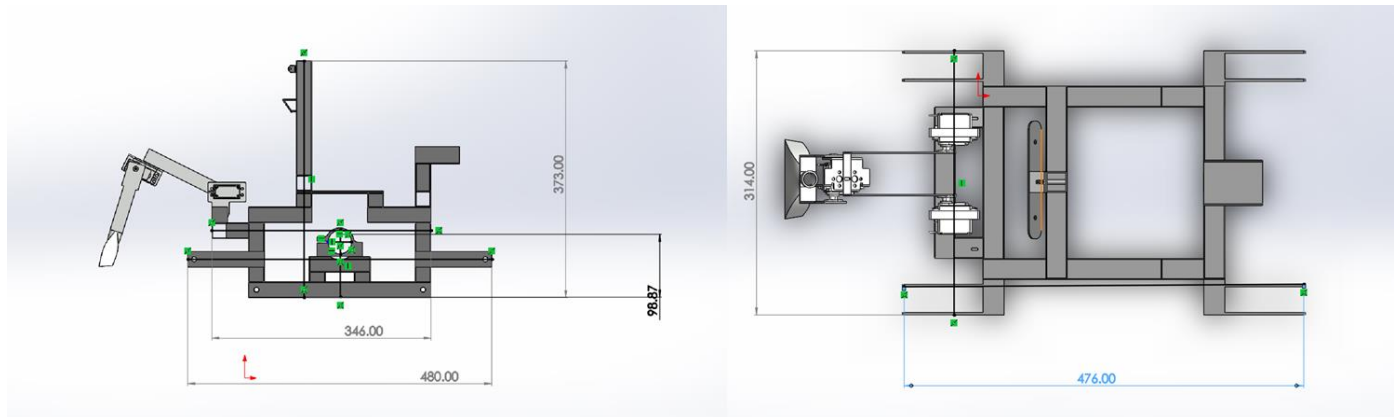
front view and top view measurement of the EPRSDC using 25 x 25 square hollow section tube pipe rages
